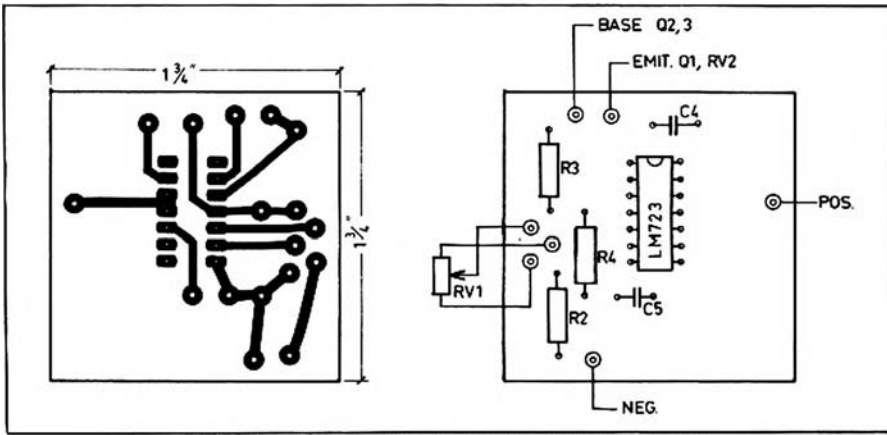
CIRCUIT BOARD AND COMPONENT LAYOUT
